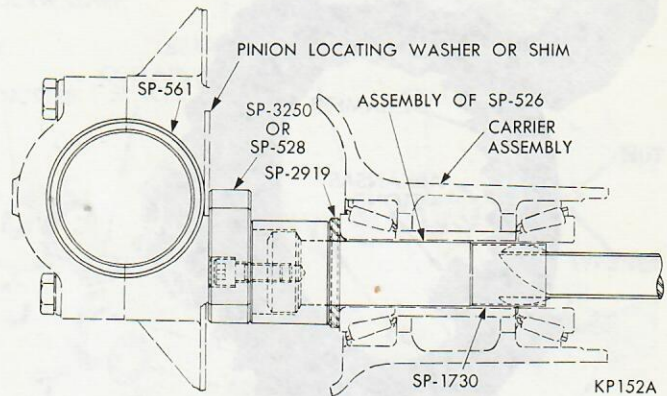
Pinion Preload with Spacer (8-3/4 in. Ring Gear)
